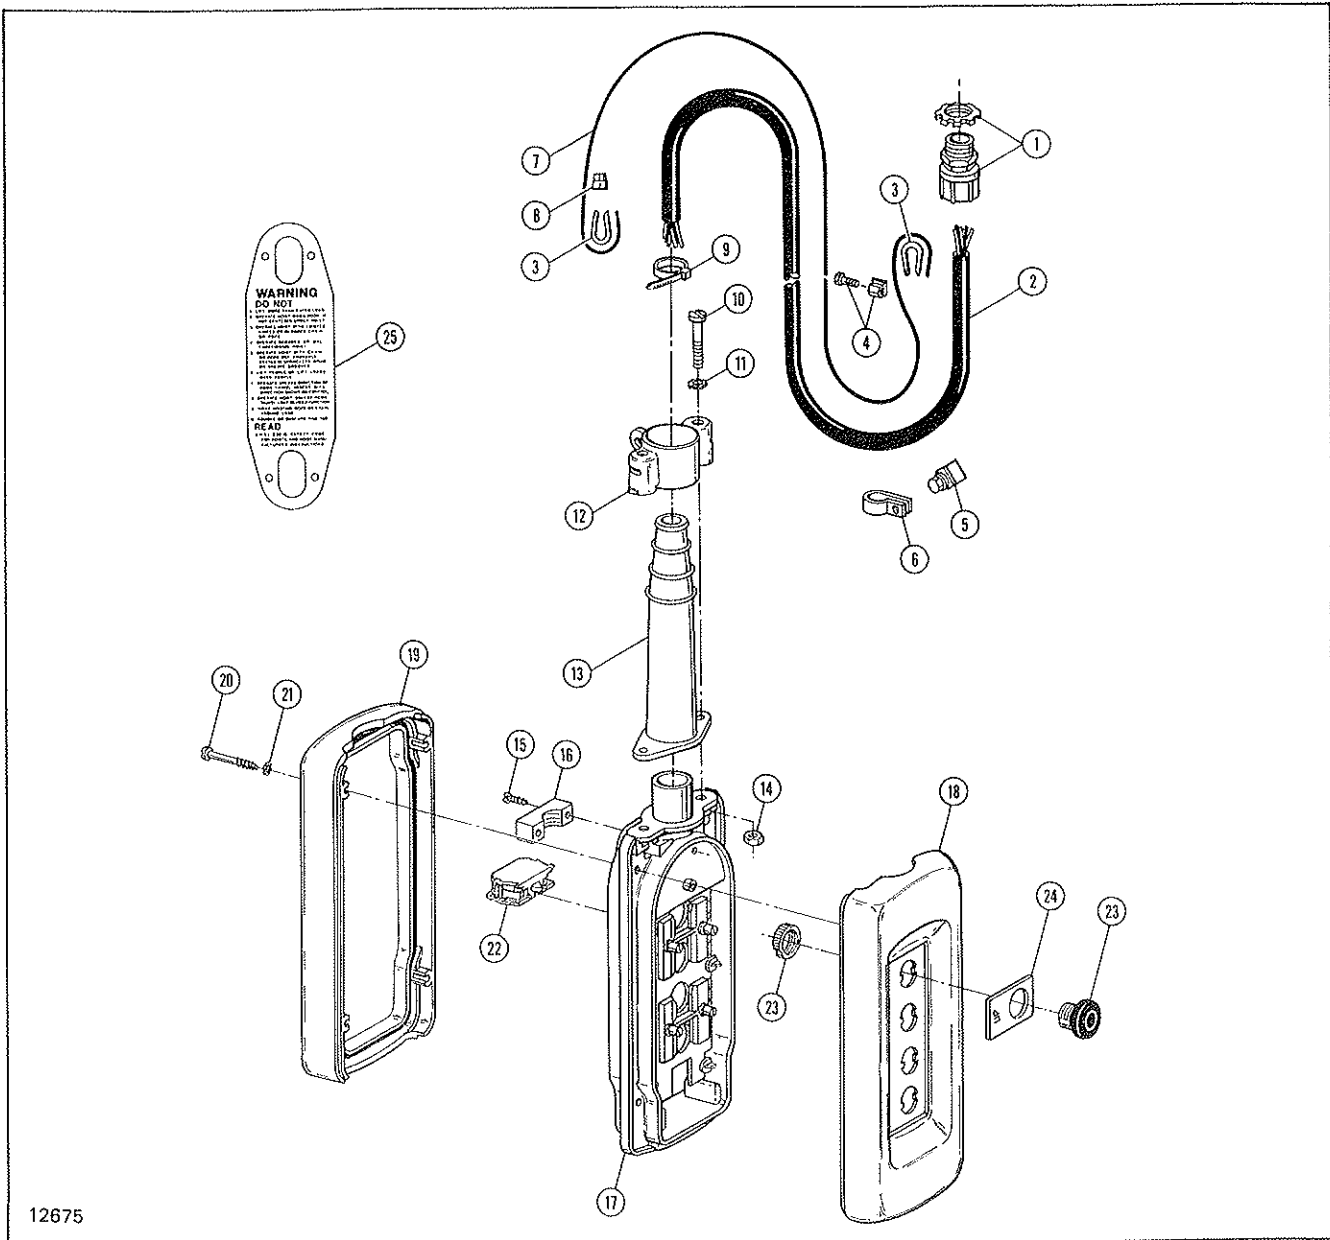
Push Button Station and Conductor Cord Assembly.
